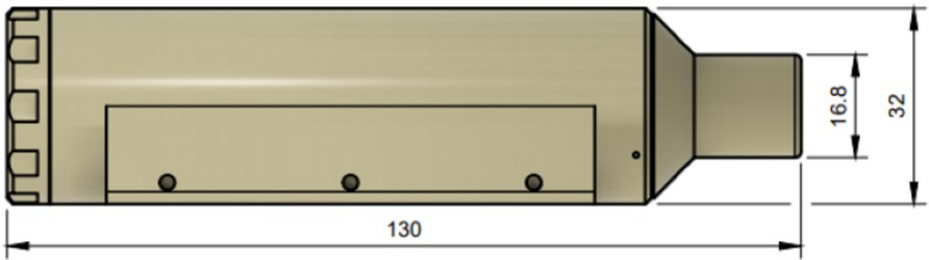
Dimensions WL-21009 Locator-A1 [mm]
